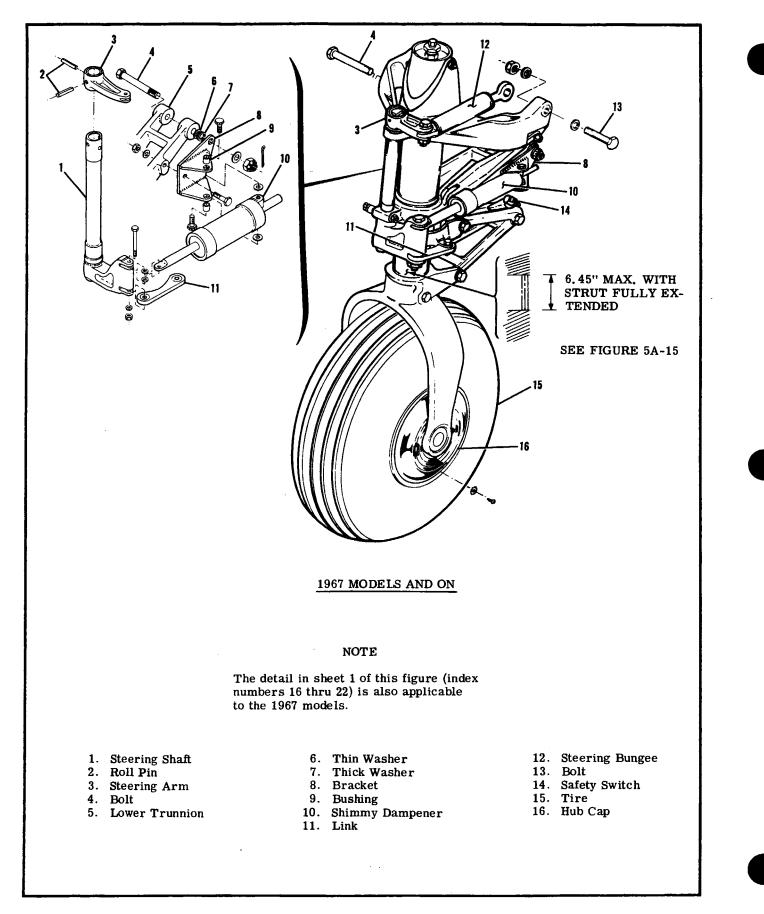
A-13. Nose Landing Gear (Sheet 2 of 2)
